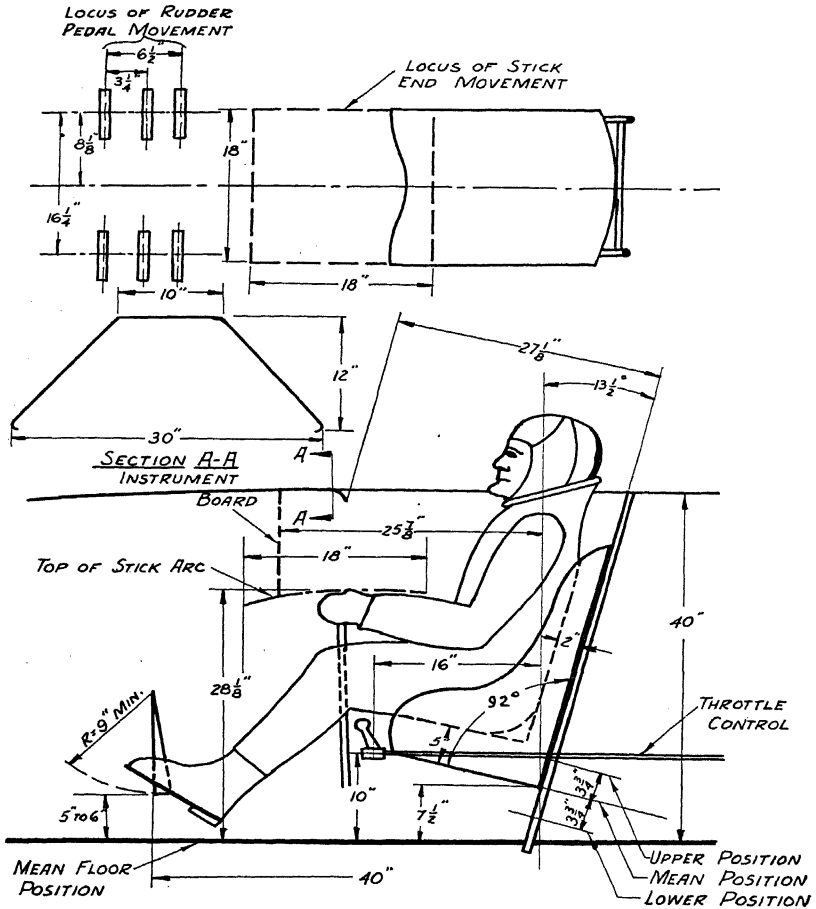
OPEN COCKPIT DIMENSIONS. ARRANGEMENT MAY ALSO BE USED FOR CLOSED COCKPITS
